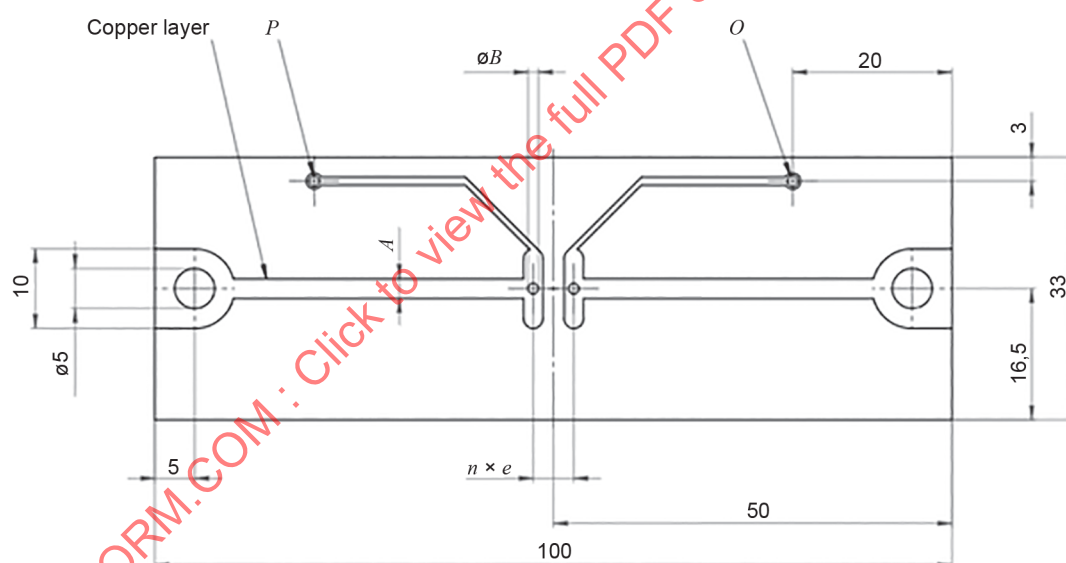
shows an example of a test board. The number and alignment of the holes for the solder terminal of the fuse-holder may be chosen to suit the relevant fuse-holder. The dimensions of the copper layer (nominal width A, nominal thickness) and the overall dimensions (approximately 100 mm × 33 mm) shall be met. ~~Table A.1 gives nominal width and nominal thickness of copper layer for test board.~~
